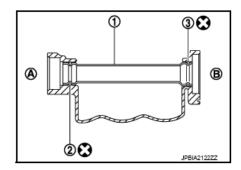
Identifying Axle Pipe And O-Rings Courtesy of NISSAN MOTOR CO., U.S.A.
